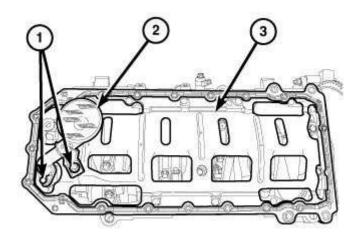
Integral Windage Tray, Oil Pump Pickup Tube & Bolts Courtesy of CHRYSLER GROUP, LLC
